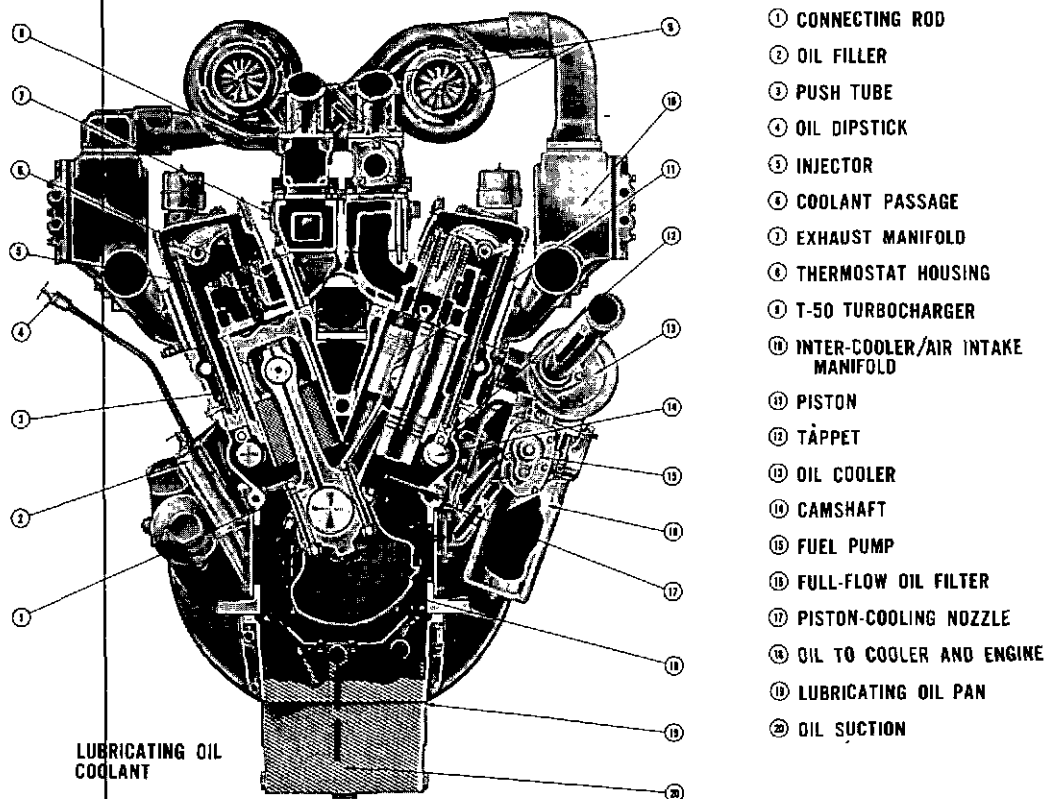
, LWC 13. Oil flow—engine end view
